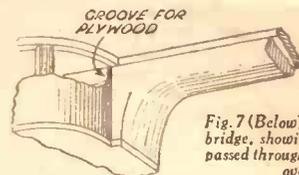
(Below)—The lower bridge, showing the strings passed through and brought over.
